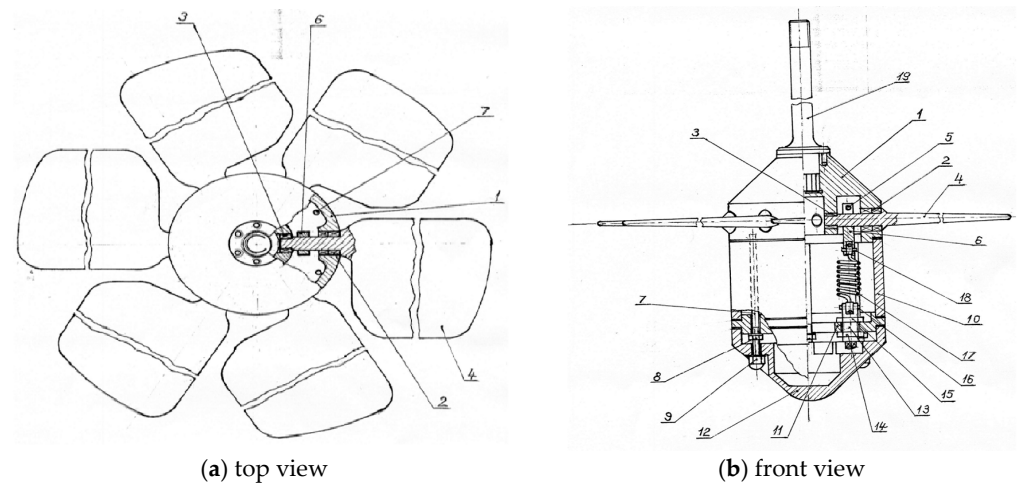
Scheme of WTOB: 1—hub, 2 and 3—sliding bearings, 4—blades, 5—bolts, 6—cranks, 7—studs, 8 and 9—nuts, 10—cylindrical corpus, 11—plate, 12—fairing, 13—pin, 14—supporting washer, 15—washer, 16—pin, 17—tension springs, 18—axis, 19—shaft.
